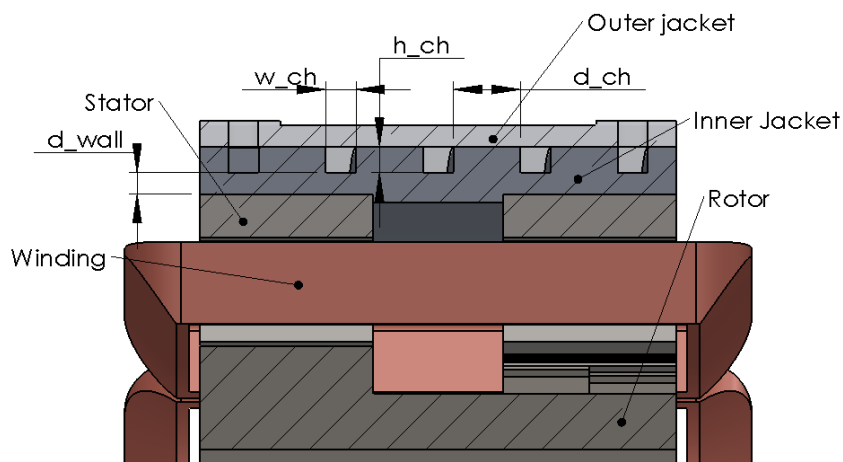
Section view of the spiral channel water jacket and dimensional parameters.
